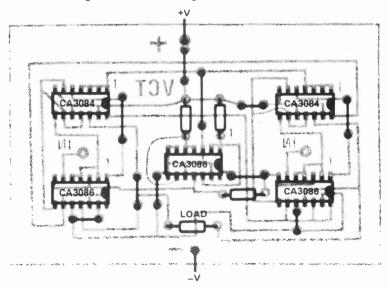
PCB layout, showing external components, wire links, etc. — view from component side.
